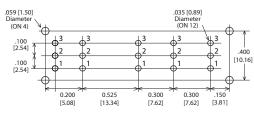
B24-31: Concentric Shafts, B24, 3 Potentiometer(s) or RS + MP, 3/8" Bushing Sections 1, 2 & 3: 2 Potentiometers or RS on Outer Shaft Section 4: Momentary Push Switch on Inner Shaft
